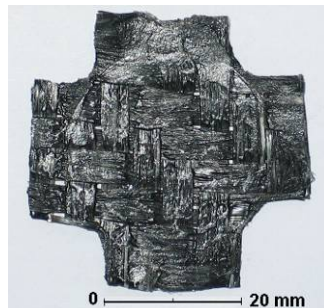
Example of a test sample following testing. The arms of the specimen are fastened under the clamping ring.
